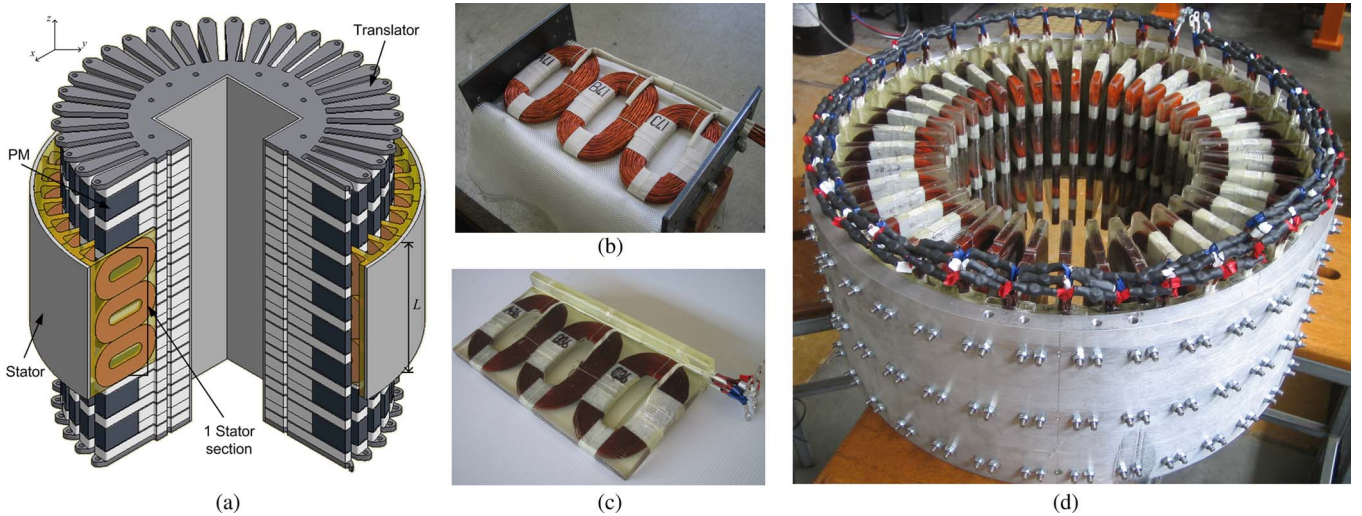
(a) Three-dimensional cutout view of the novel air-cored PM LG. (b) Three preformed coils as laid up in the mold and (c) the finished stator section after removing from the mold. (d) Completed stator consisting of 38 molded stator sections bolted to the inside of an aluminum ring and connected in series.
